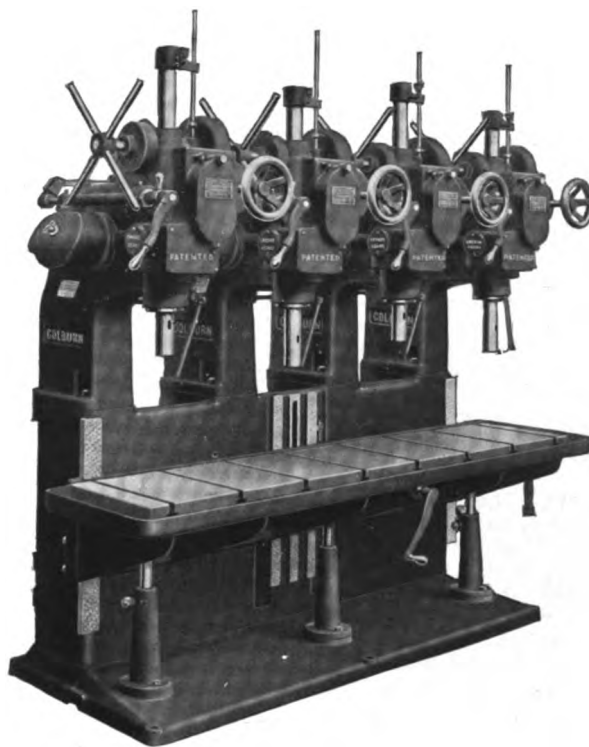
FOUR-SPINDLE NO. 2 "MANUFACTURING" HEAVY DUTY DRILL PRESS
